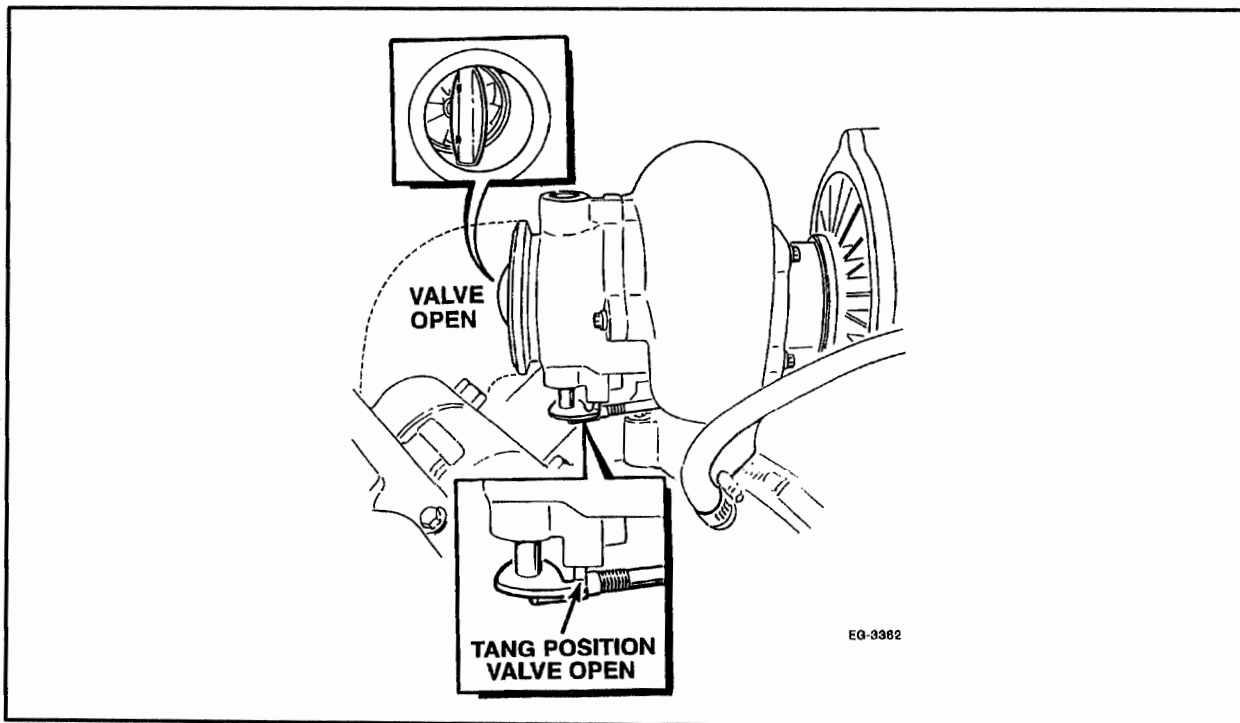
Checking Position of Exhaust Back Pressure (butterfly) Valve At High Idle
